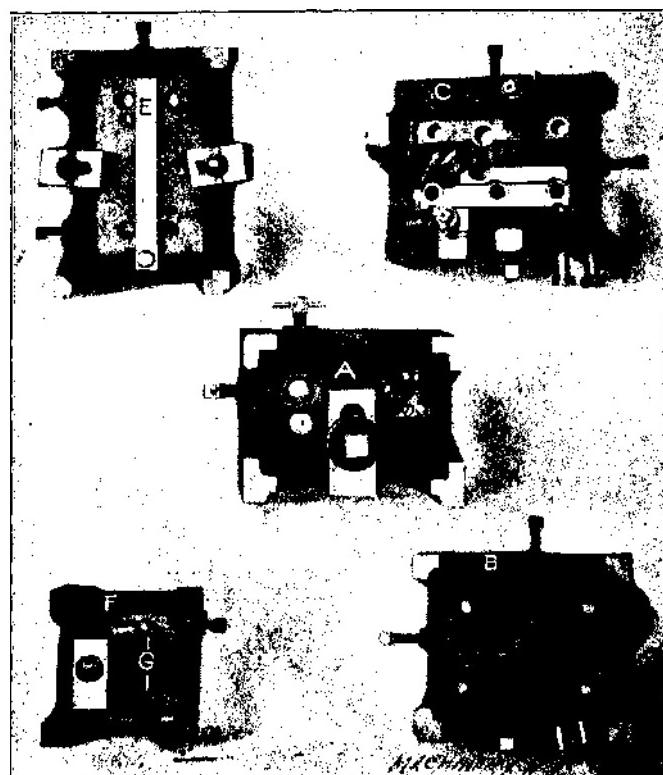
Miscellaneous Examples of Open Drill Jigs
